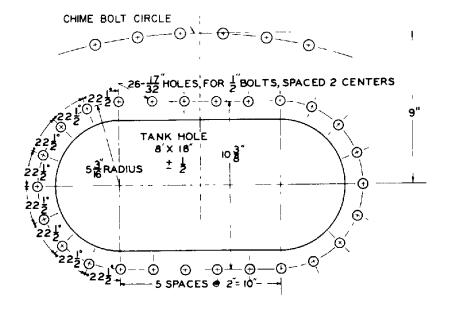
Bolting Pattern for 8-in. \times 18-in. Oblong Thief Hatches, Pressure-relief, and Vacuum-relief Valves
